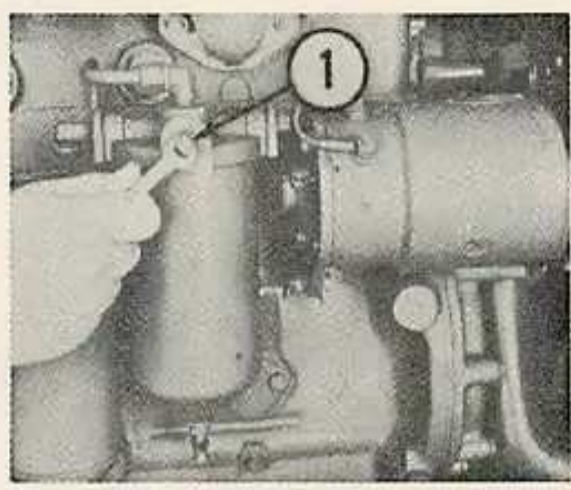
Remove plug (1) to purge air from primary fuel filter.
